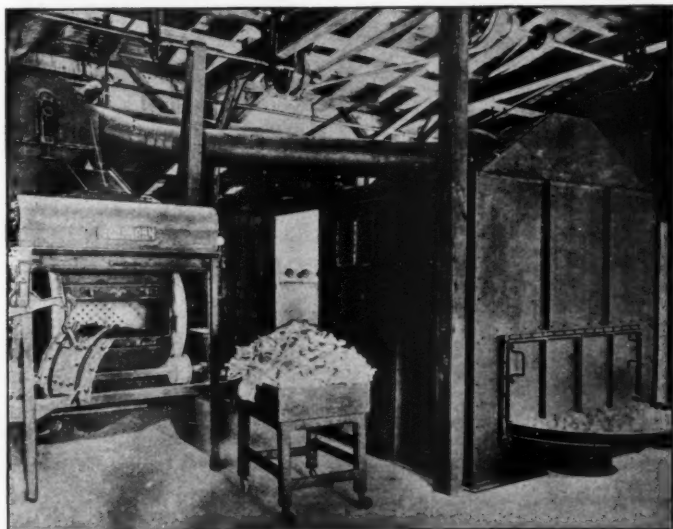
COMBINATION ROOM AND BARREL INSTALLATION
